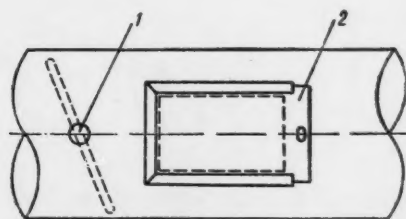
Peephole in air pipe. 1) Throttle valve; 2) gate valve.
